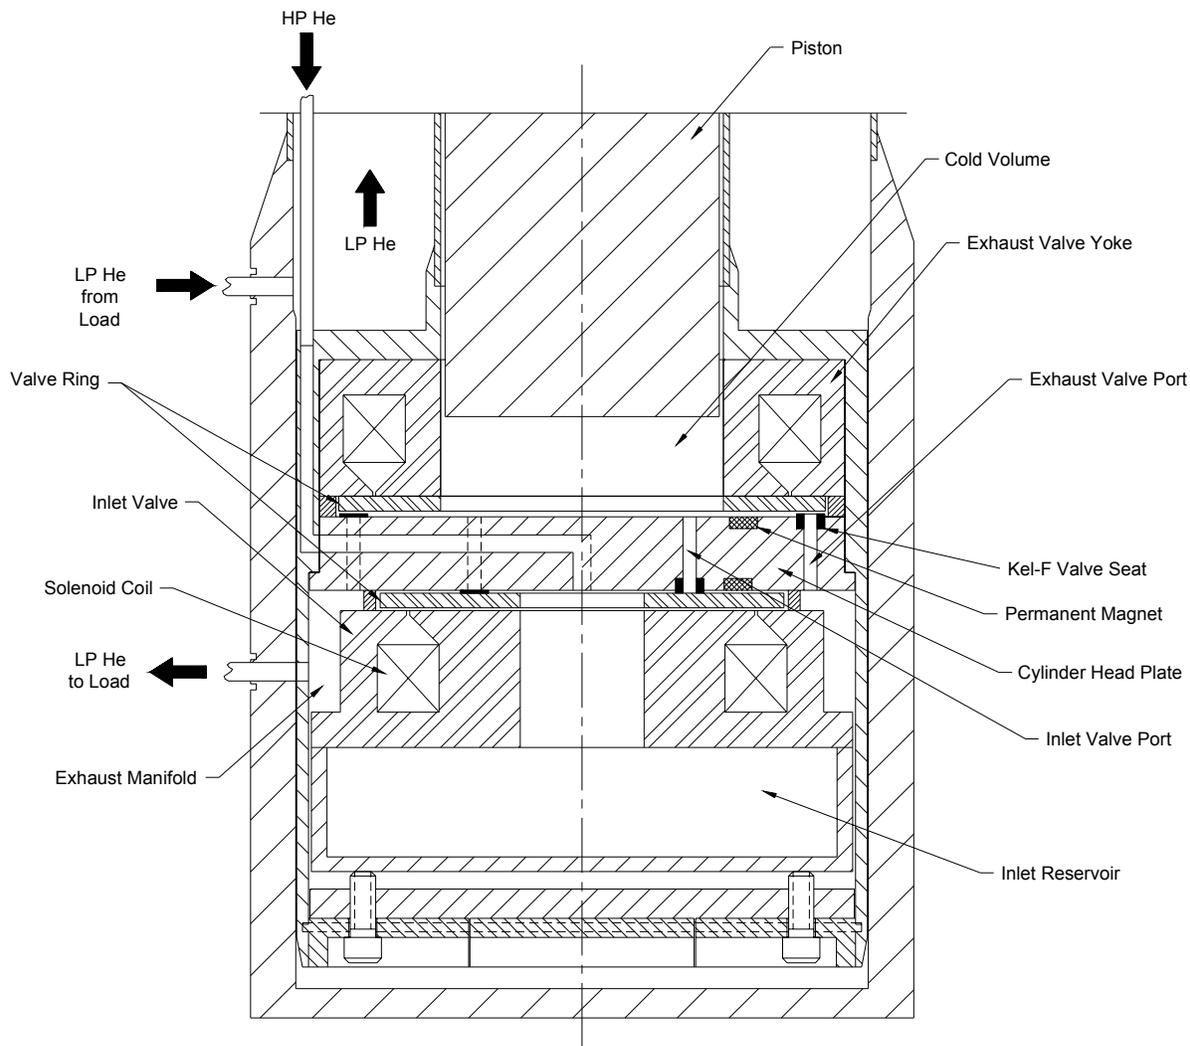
Schematic cross section of the expander cold end showing the annular valves
